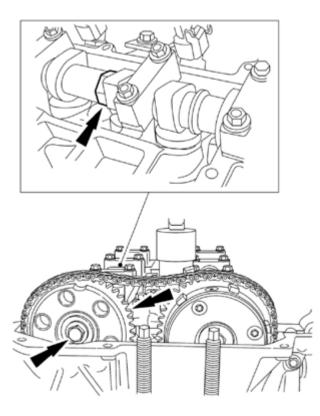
Rotating Exhaust Camshaft Clockwise Courtesy of FORD MOTOR CO.
